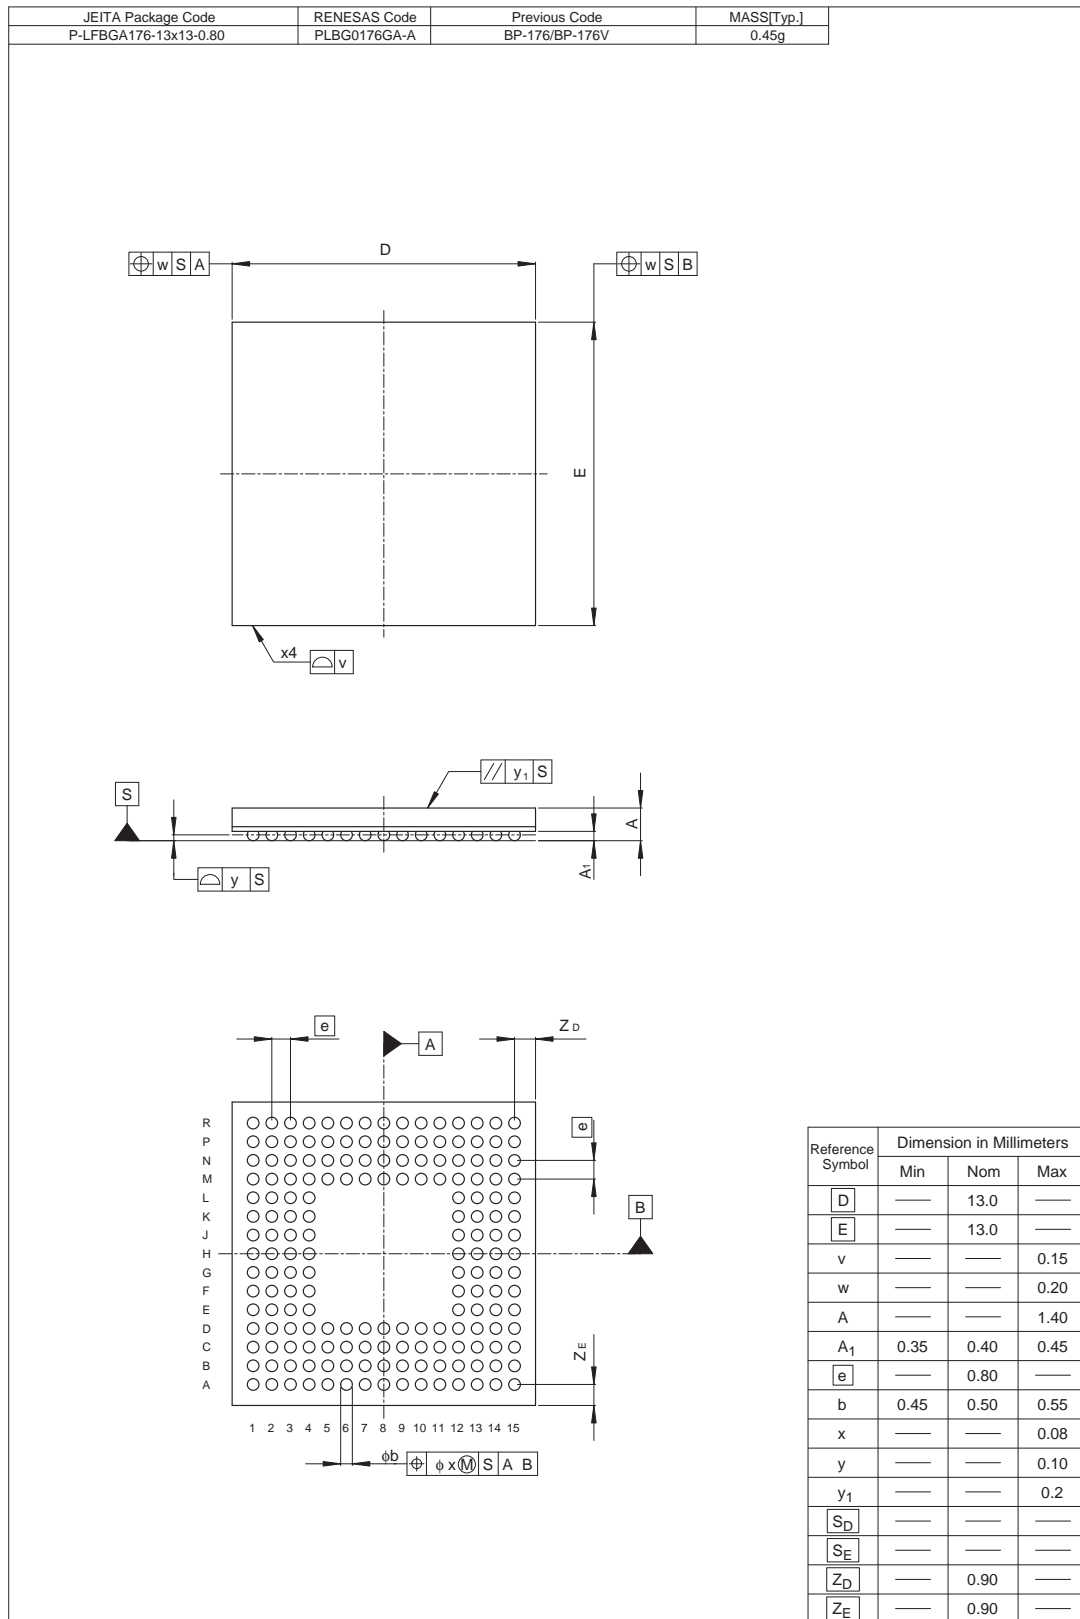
Pin LFBGA (PLBG0176GA-A) Package Dimensions
